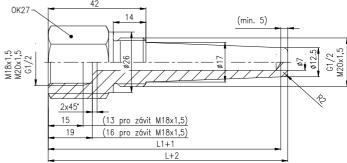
DIMENSIONAL DRAWING, TABLE OF DESIGNS AND WEIGHTS OF THERMOWELLS, SHAPE 6 PURSUANT TO DIN 43772, EXTERNAL THREAD G1
